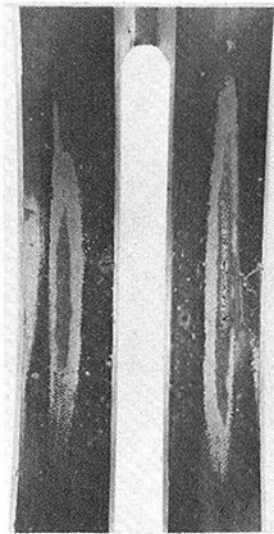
Suction damage in upper half main bearing of high speed diesel engine
